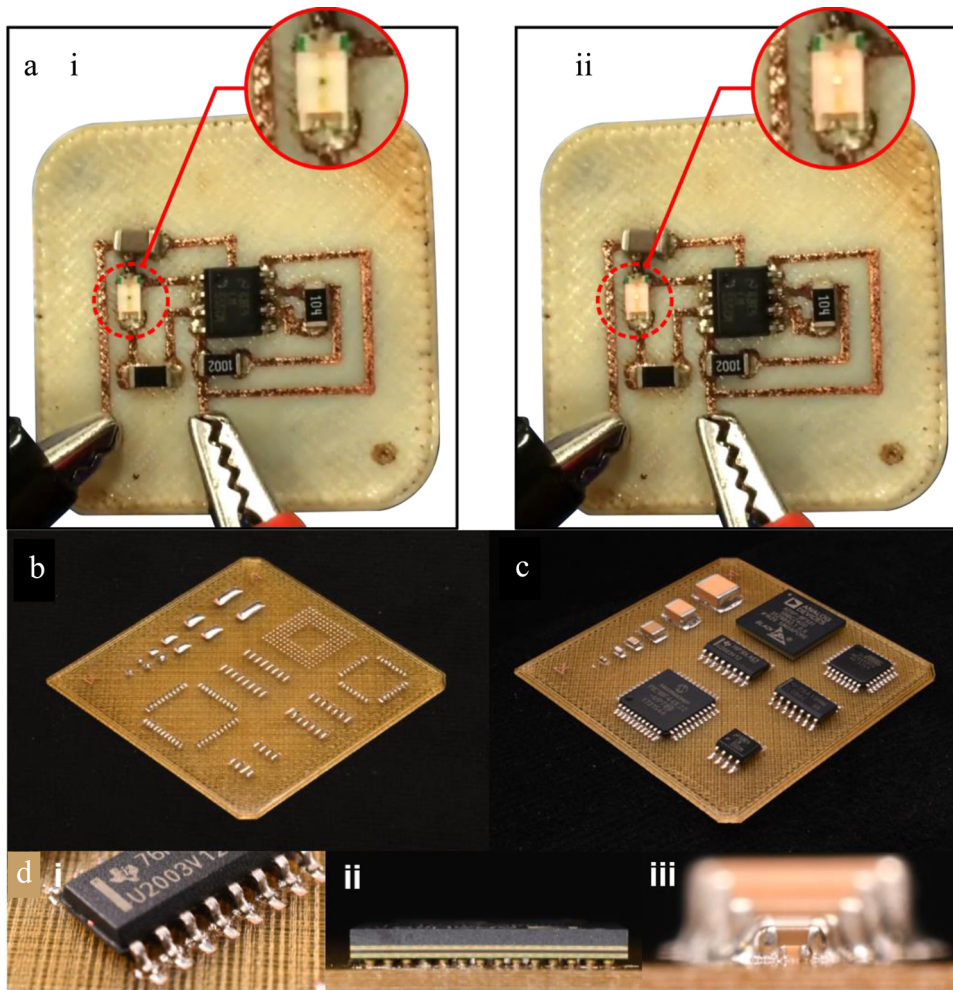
Electronic packaging (a) 555 timer with flashing LED powered (i) LED off; (ii) LED on. (b) Solder reflowed surface mount test board. (c) Range of assembled surface mount components including capacitors from 5650 to 0603 (metric), a 160 pad mini-Ball Grid Array (mBGA), leaded Quad Flat Packages (QFP) and Small Outline Integrated Circuits (SOIC). (d) Close-ups of test board: (i) solder fillets on SOIC; (ii) side view of mBGA; (iii) series of capacitors increasing in size.
